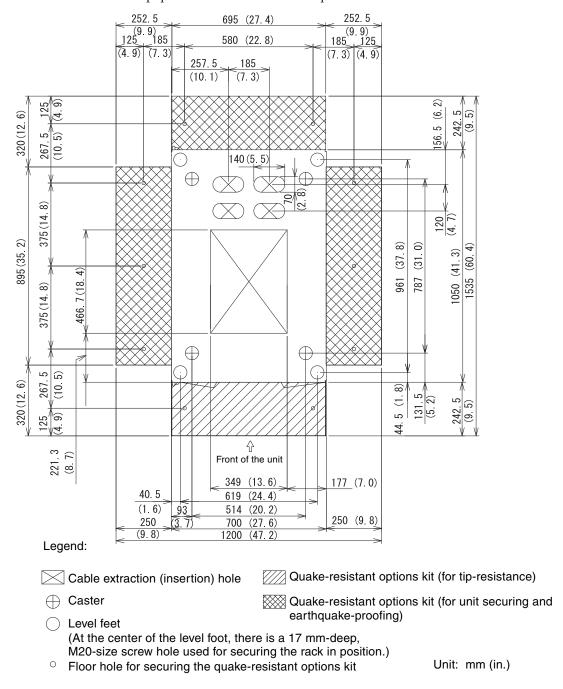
Floor Plan of the Equipment Rack Model 1640/1624
